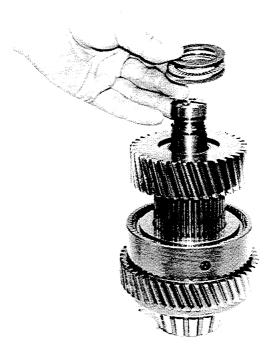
Removing or Installing the Rear Thrust Bearing, Spacer and Washer from the Reverse Clutch Shaft.
